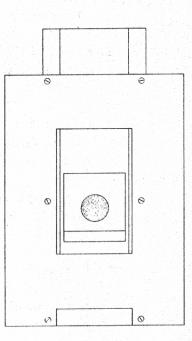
Modified shear tool with plug-holding device in place and specimen ready for testing.
